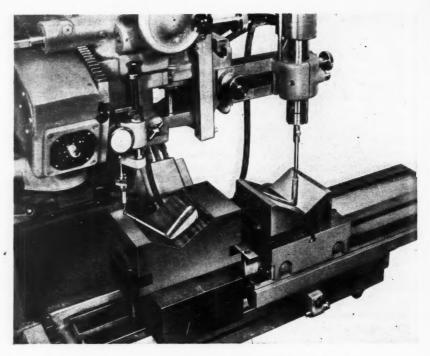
Cincinnati tool and die miller equipped with new "reverse image" attachment for making dies, molds, and hobs from masters of the opposite hand. Illustration shows set-up for milling golf club dies
